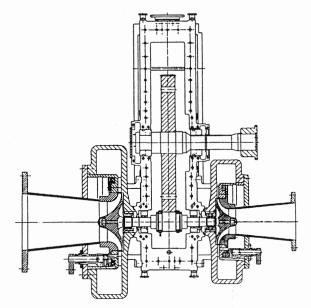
Two Stage Integrally Geared Radial Expander with One Pinion Shaft.
